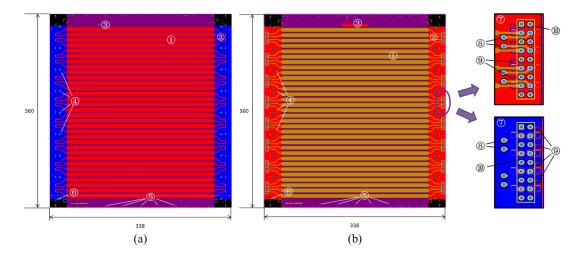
The PCB design of MRPC2. (a) TOP and BOT PCB. (b) MID PCB. The marked structures are: ① readout strips; ② transmission lines; ③ pad for HV application; ④ screw hole for mechanics; ⑤ fishline screw hole; ⑥ installation hole for mechanic spacers; ⑦ grounded pour; ⑧ signal pin hole; ⑨ 200 k Ω for spark protection; ① 2 × 9 pin signal connector.
